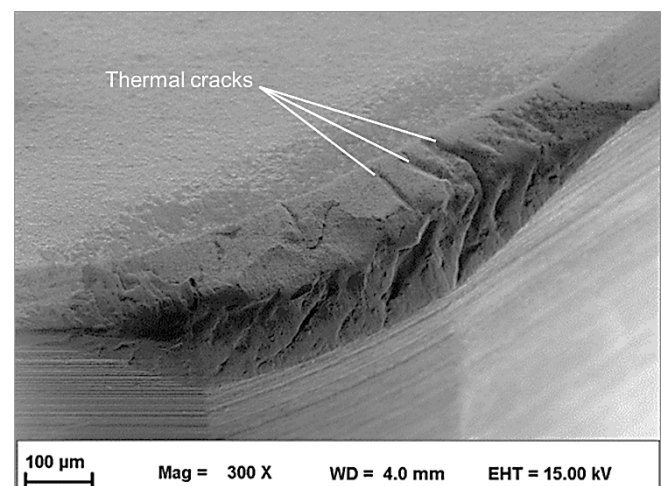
Thermal cracks developed on the cutting edge at cutting condition C, see Table 1.
